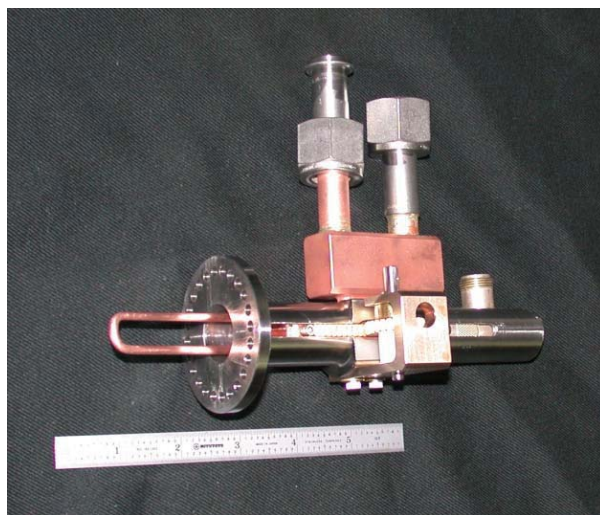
Mark IV Coupling Loop Assembly ready for installation into the cavity.
